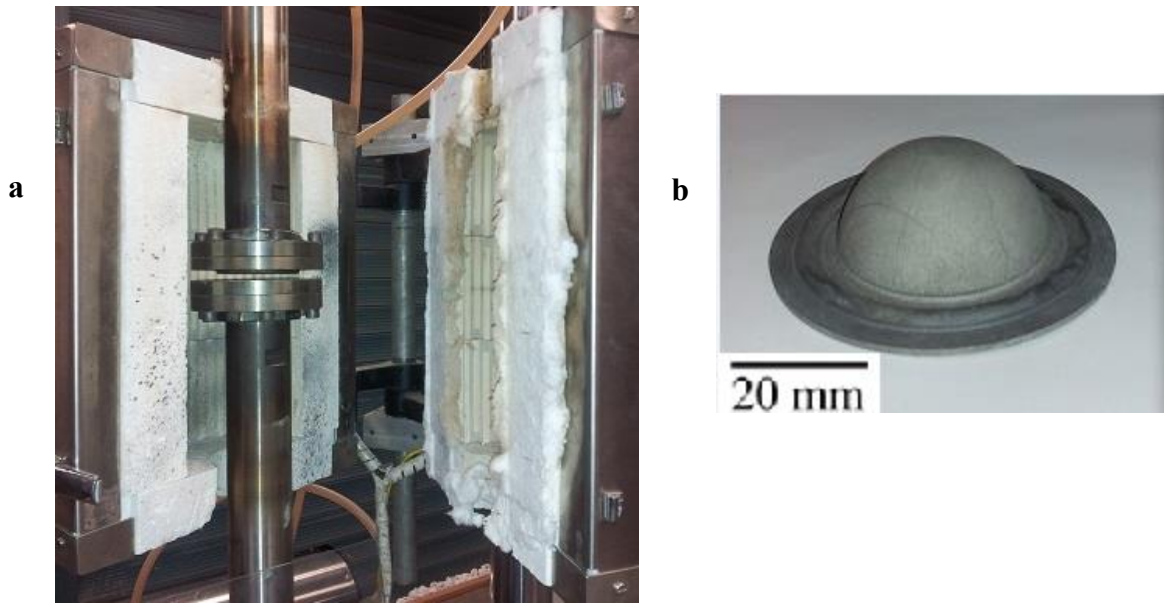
Photographs show (a) the biaxial bulge test die holders in the furnace and (b) a specimen after the test was completed.
